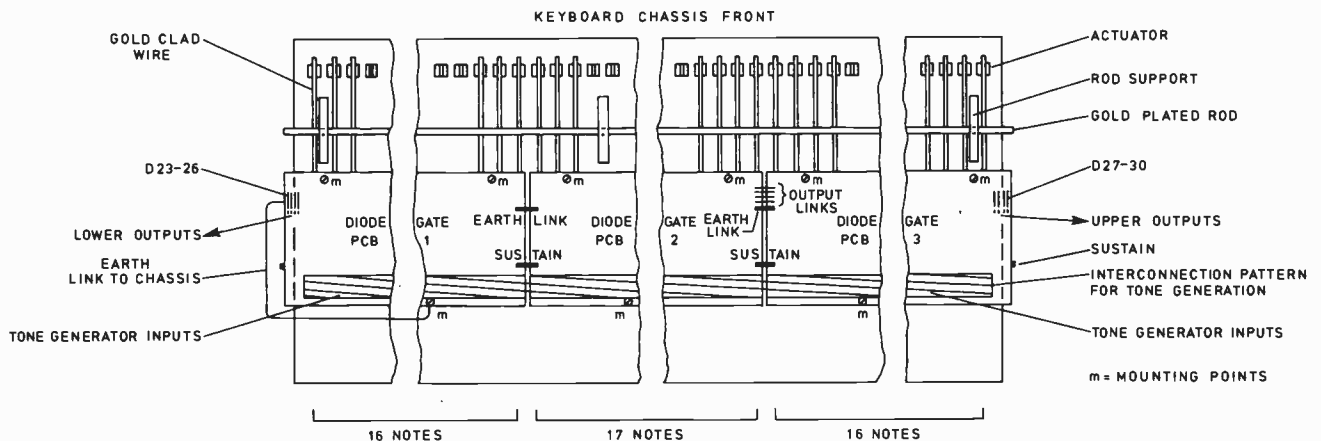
Assembly of Diode Gate p.c.b.s under Veroboard
